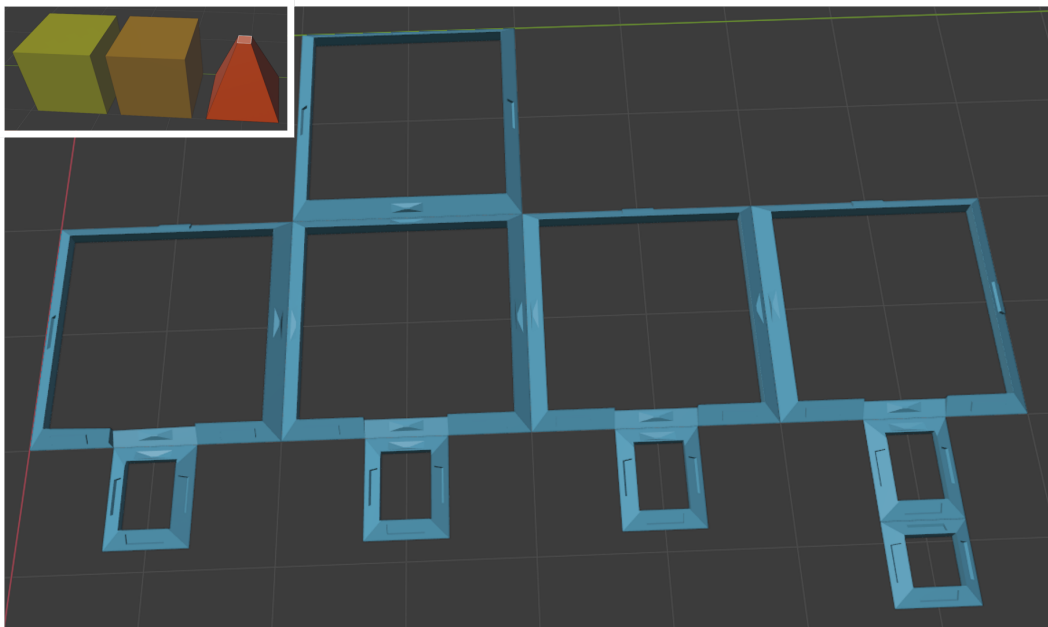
Adjusting connector blueprints on folding edges, for example to make folding easier. Refreshing.
